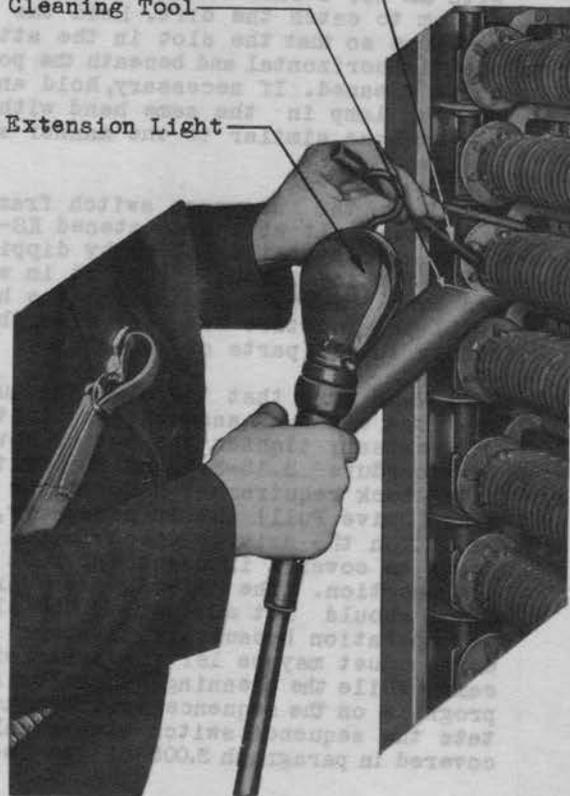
Method of Cleaning Adjacent Surfaces of "A" and "B" Cams
